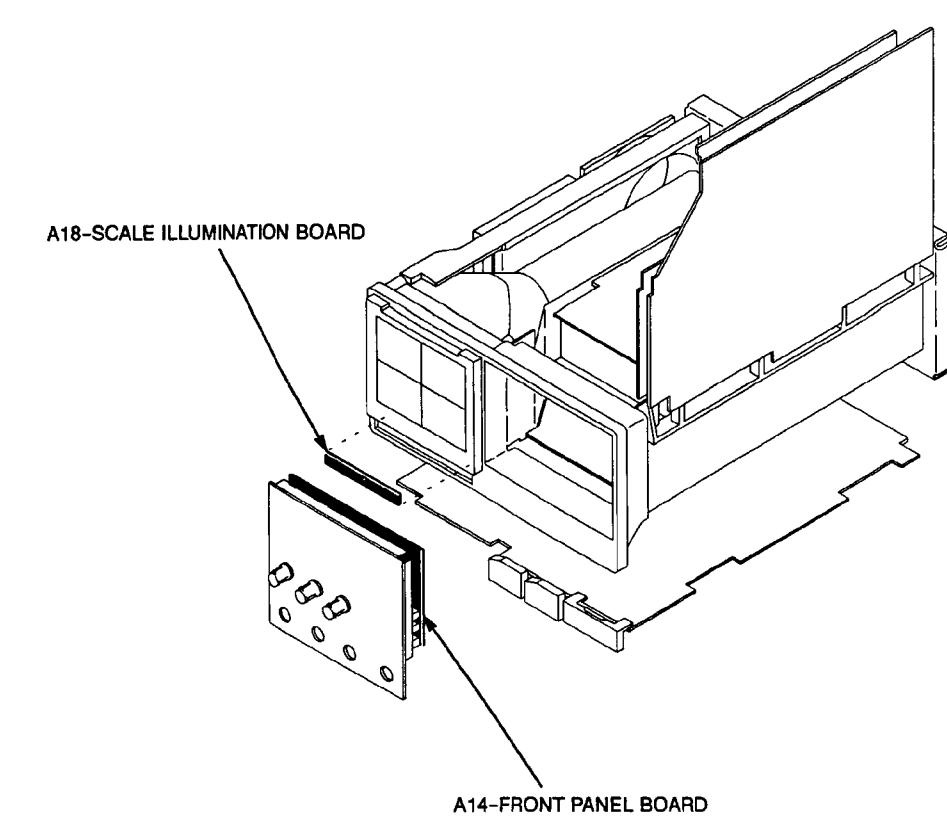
A14 Front Panel Board and A18 Scale Illumination Board Component Locator. FP-29/(FP-30 blank)
